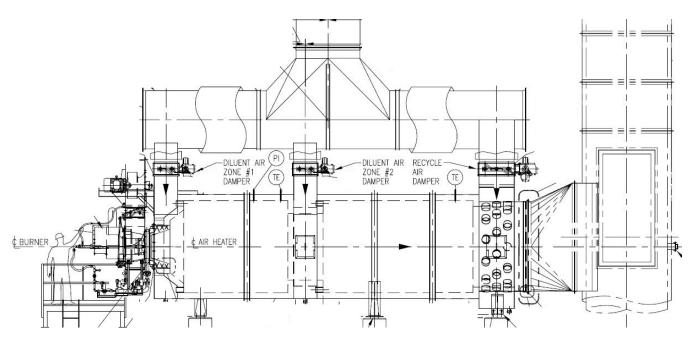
Burner and combustion chamber detail (From drawing CAN06-DM-101 provided by manufacturer)
